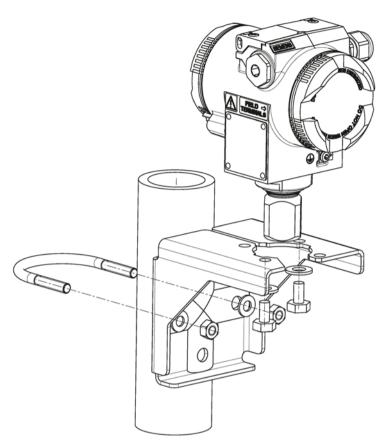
Fastening the pressure transmitter on the mounting bracket
